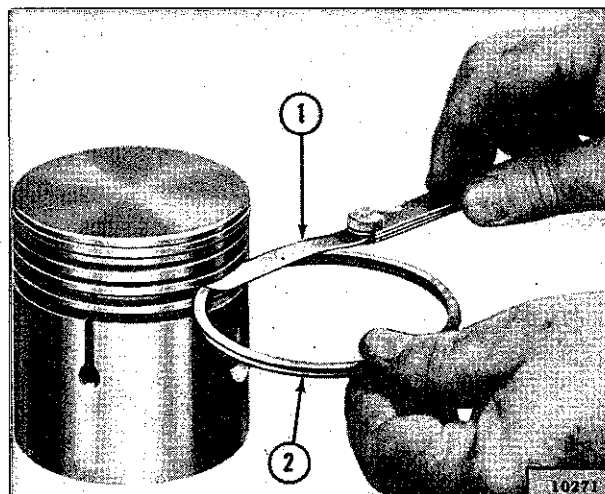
CHECKING PISTON RING SIDE CLEARANCE
